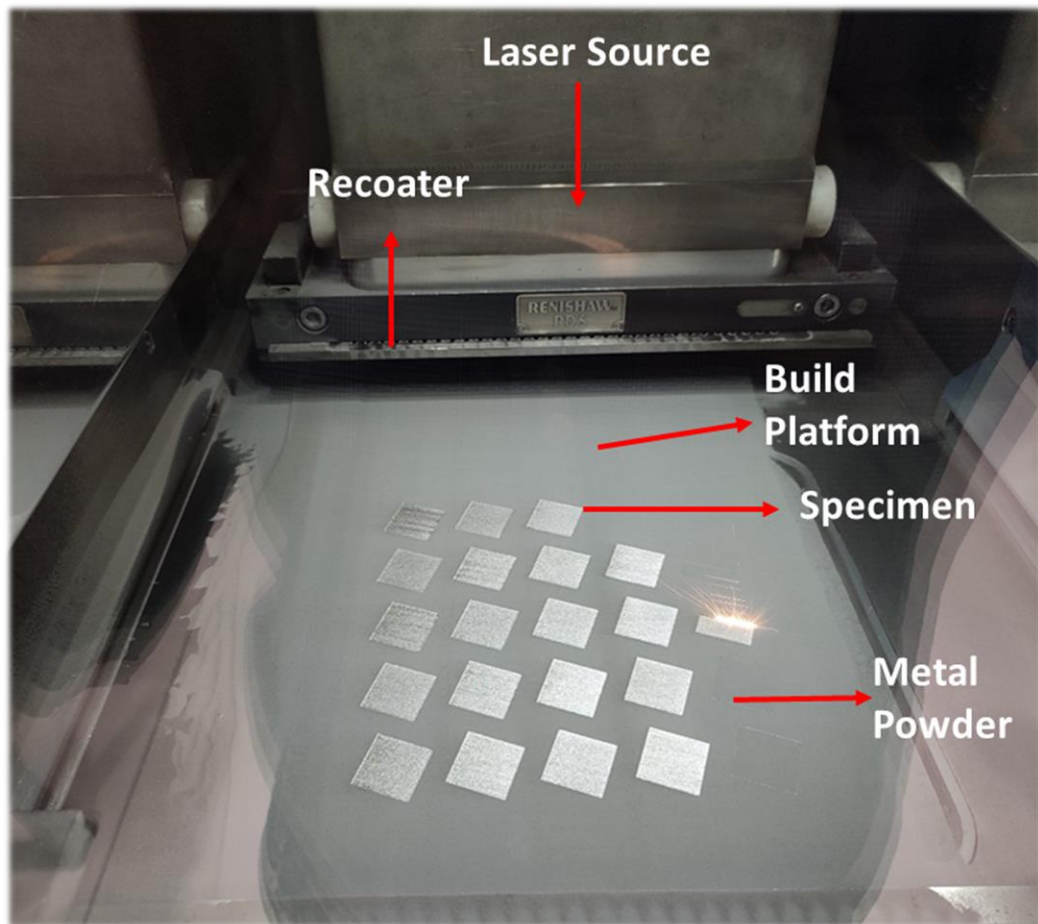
Renishaw AM400 laser powder bed fusion additive manufacturing equipment interior view
